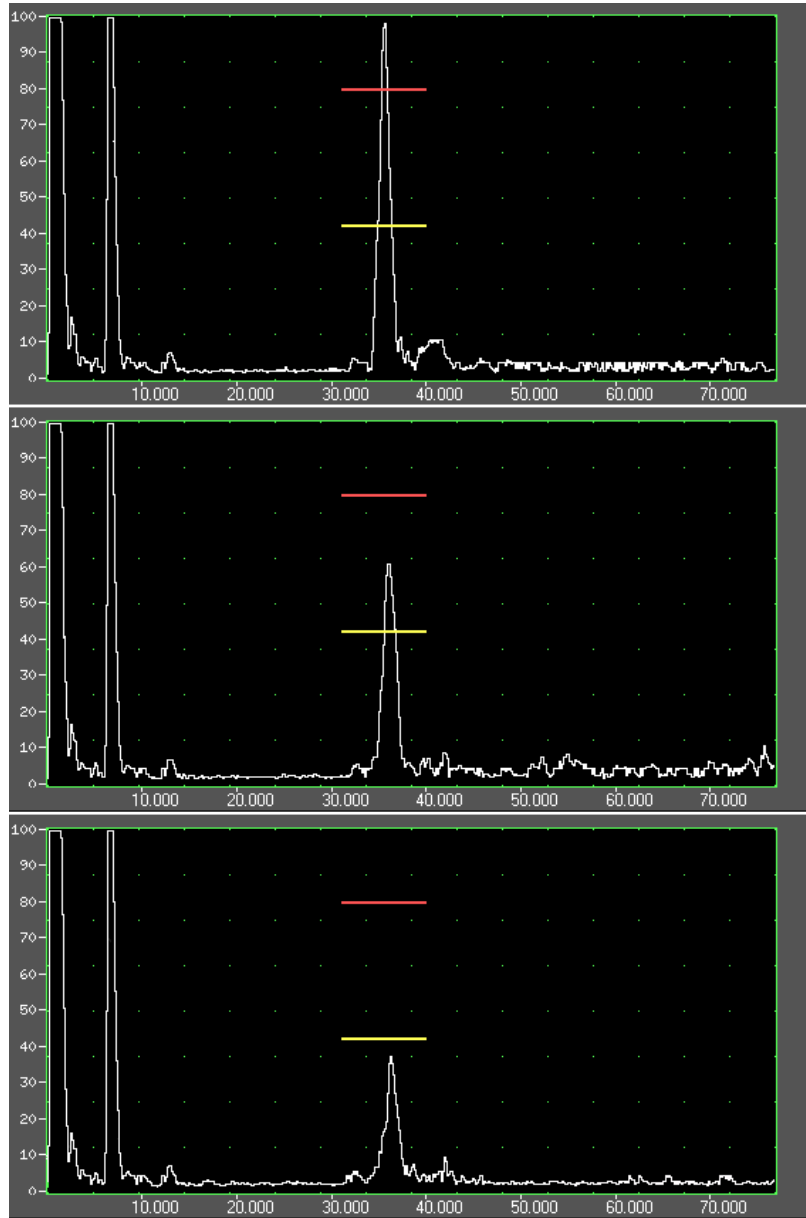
2.5" Dia. x .034" stainless steel tube with a gain of 11.1 dB. Top - 0.062" hole, Middle - 0.031" hole, Bottom - 0.018" hole
